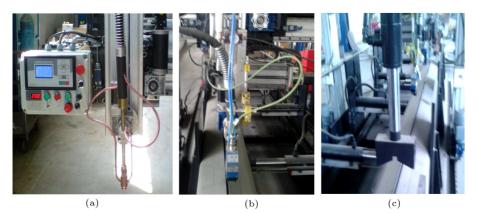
The implemented welding manipulator: a) Initial prototype, b) final prototype, and c) pressing corner joint of boom with hydraulic activator after welding process [25].
